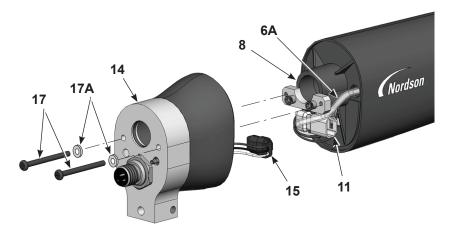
Bar-Mount Spray Gun Disassembly 1 of 3
